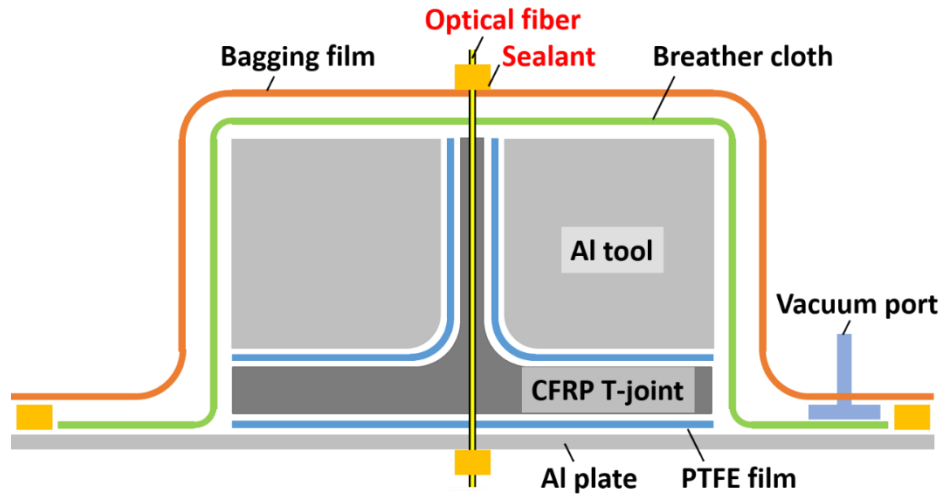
Assembly and bagging of specimen used in strain measurement.
